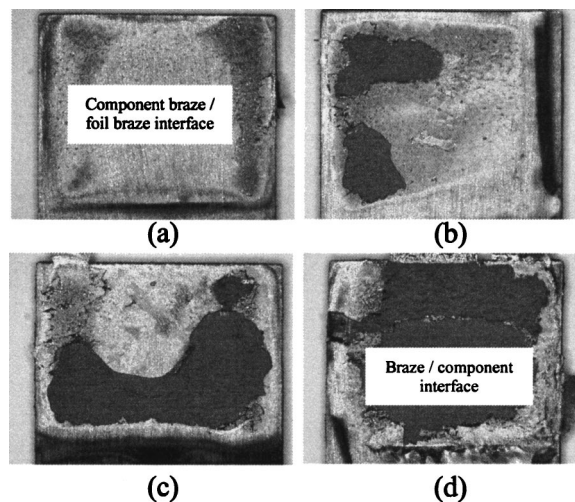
Fracture surfaces after tensile shear tests of joints made using reactive foils containing 2000 bilayers: (a) only a small area of the braze on the titanium component appears to have melted and failure occurs exclusively along the component braze/foil braze interface (foil thickness = $92 \mu\text{m}$, joint strength = 10 MPa); (b) failure also starts to occur along the braze/component interface shown by the darker area (foil thickness = $98 \mu\text{m}$, joint strength = 26 MPa); (c) failure along the braze/component interface becomes more significant (foil thickness = $112 \mu\text{m}$, joint strength = 35 MPa); and (d) failure is now almost exclusively along the braze/component interface (foil thickness = $126 \mu\text{m}$, joint strength = 39 MPa).
